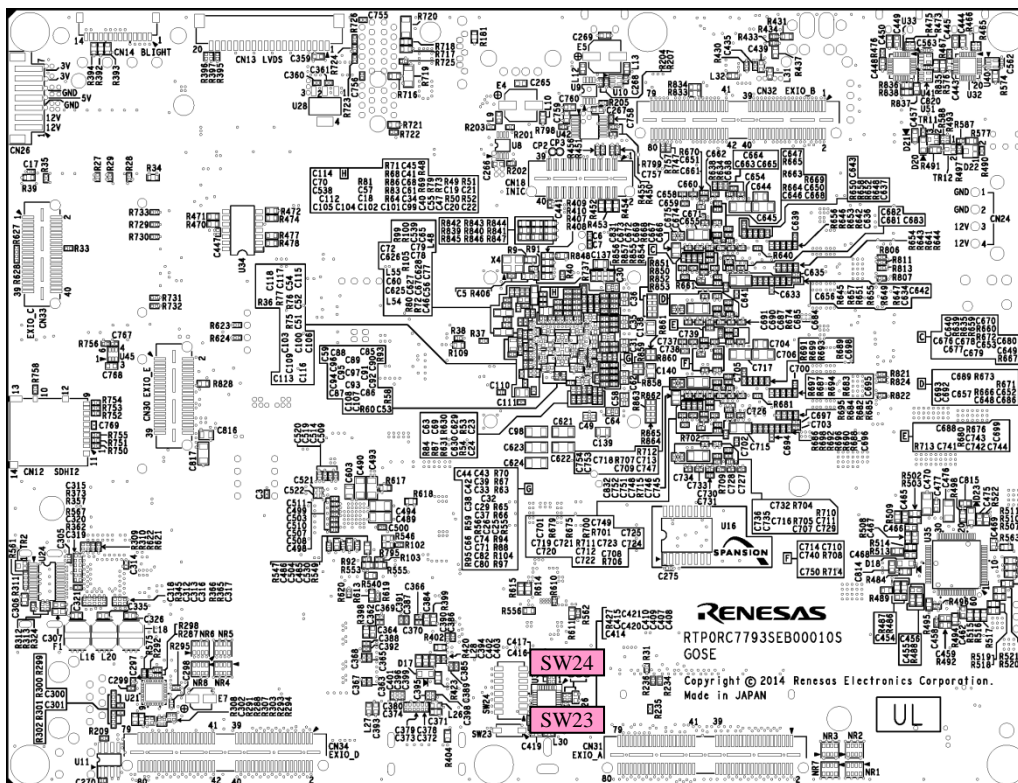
Locations of Switches on the GOSE Board (Solder Side)
